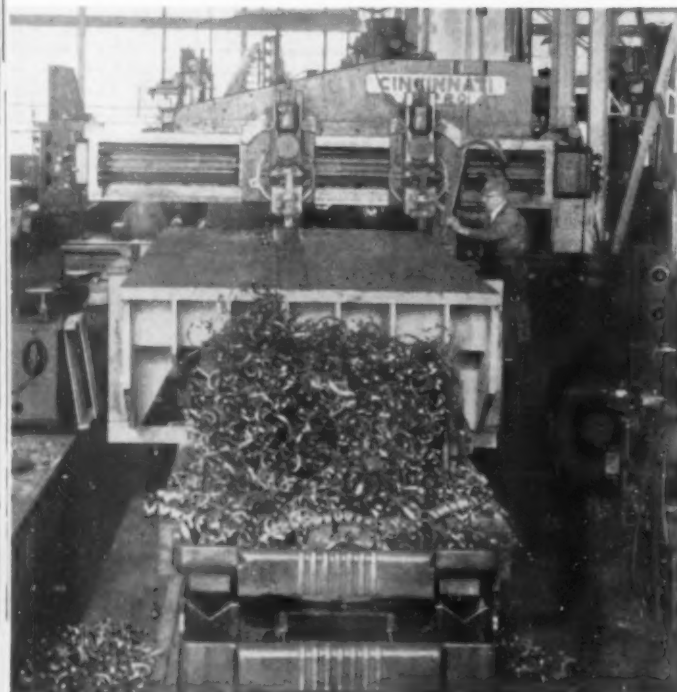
New cutting tool used to plane a mild steel weldment with huge savings in time over previous equipment and methods.
